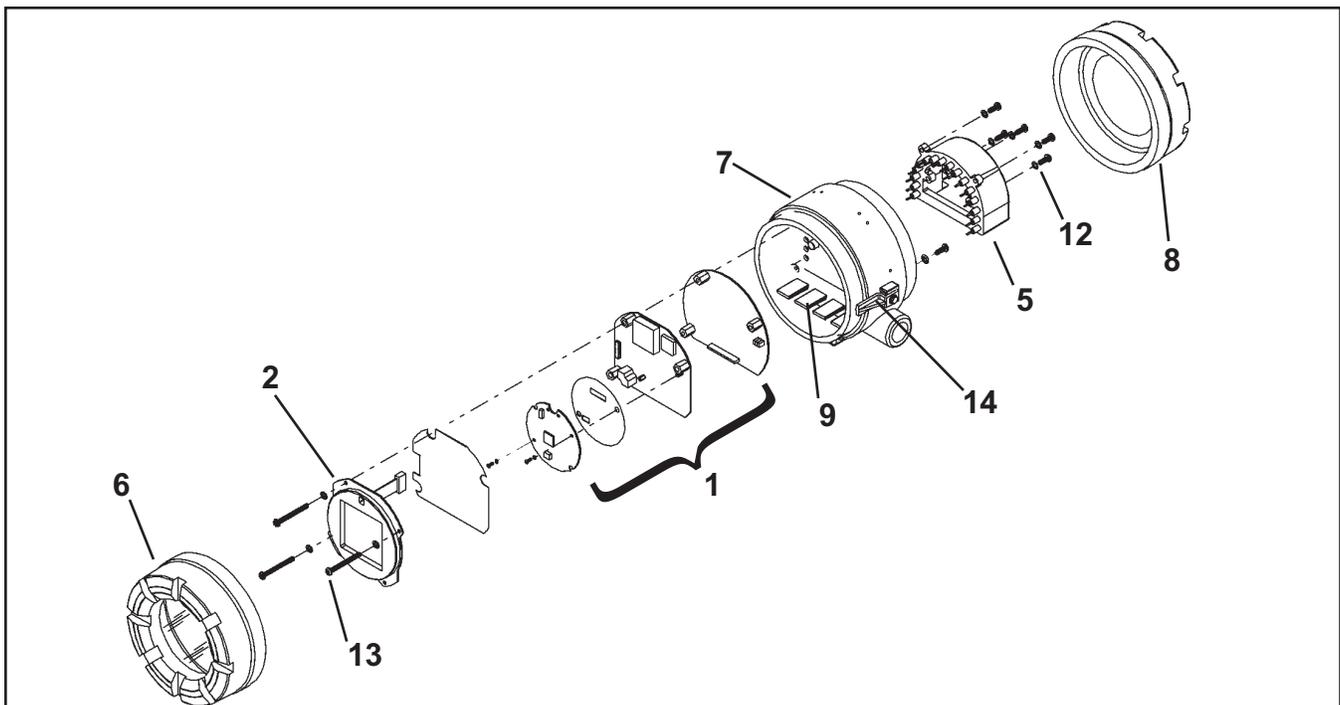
Exploded View of Model 5081-A Transmitter
